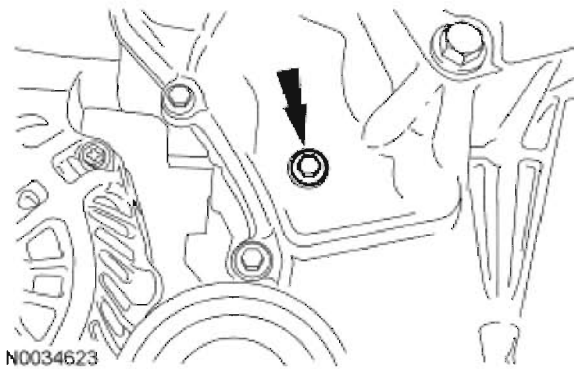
Aligning Crankshaft Pulley Bolt Holes
